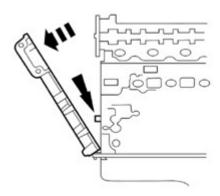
Locating Front Cover Fasteners Courtesy of FORD MOTOR CO.
